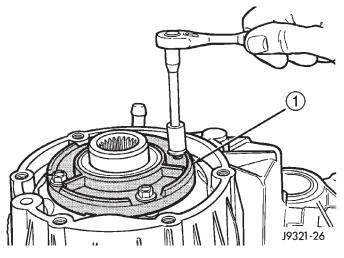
Front Bearing Retainer Bolt Removal 1 – FRONT BEARING RETAINER
